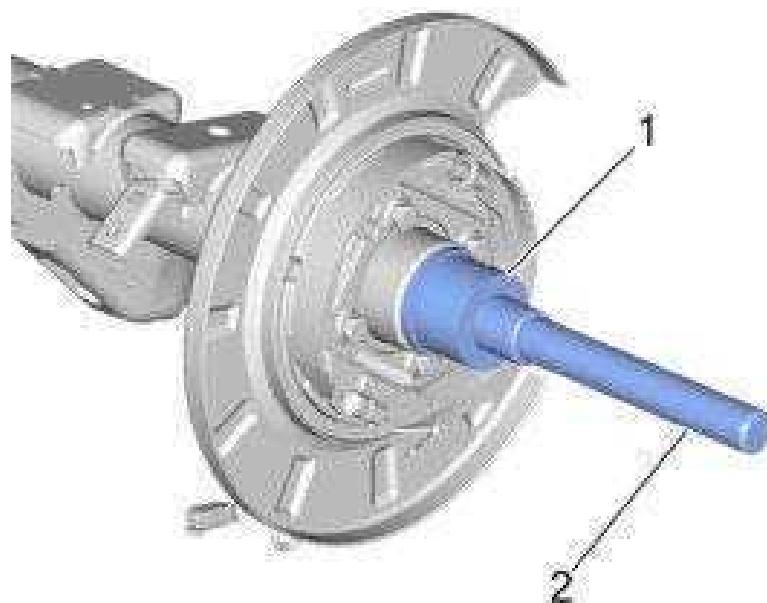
Installing Rear Wheel Speed Sensor/Reluctor Ring
